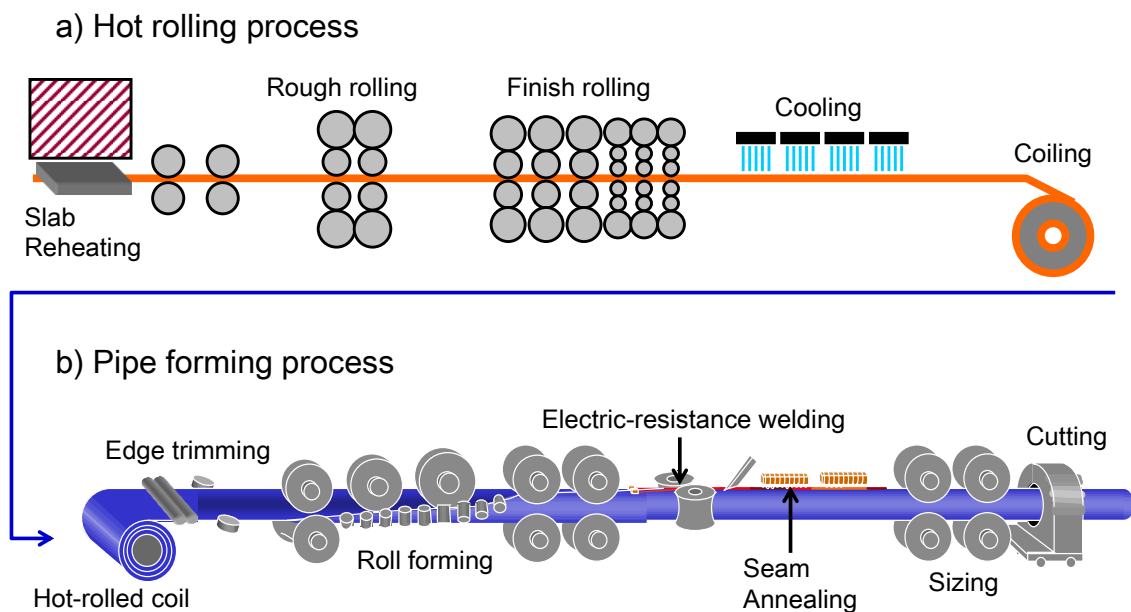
Manufacturing process of electric-resistance welded steel pipe
